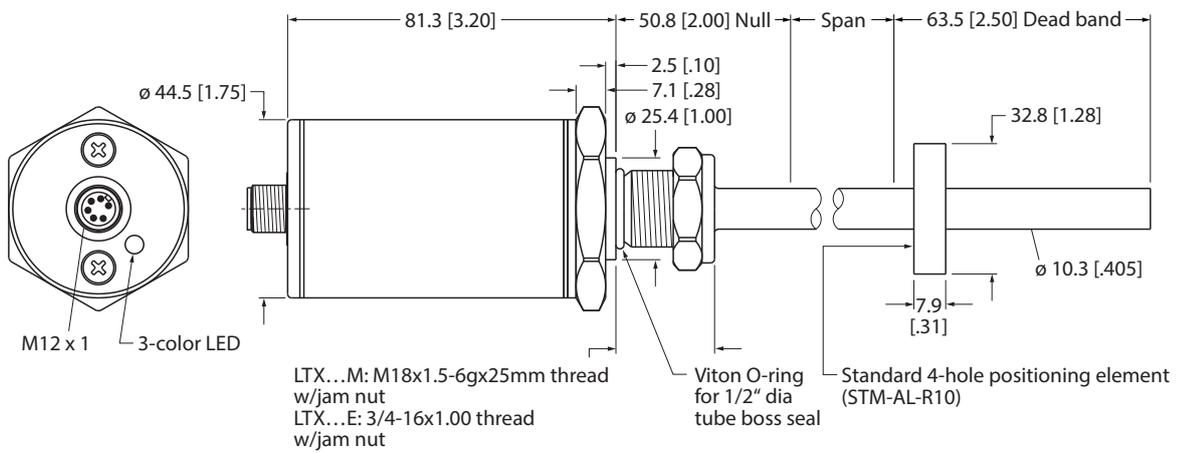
Side view LTX-R10 with dimensions in mm [in] (design with raised face)
